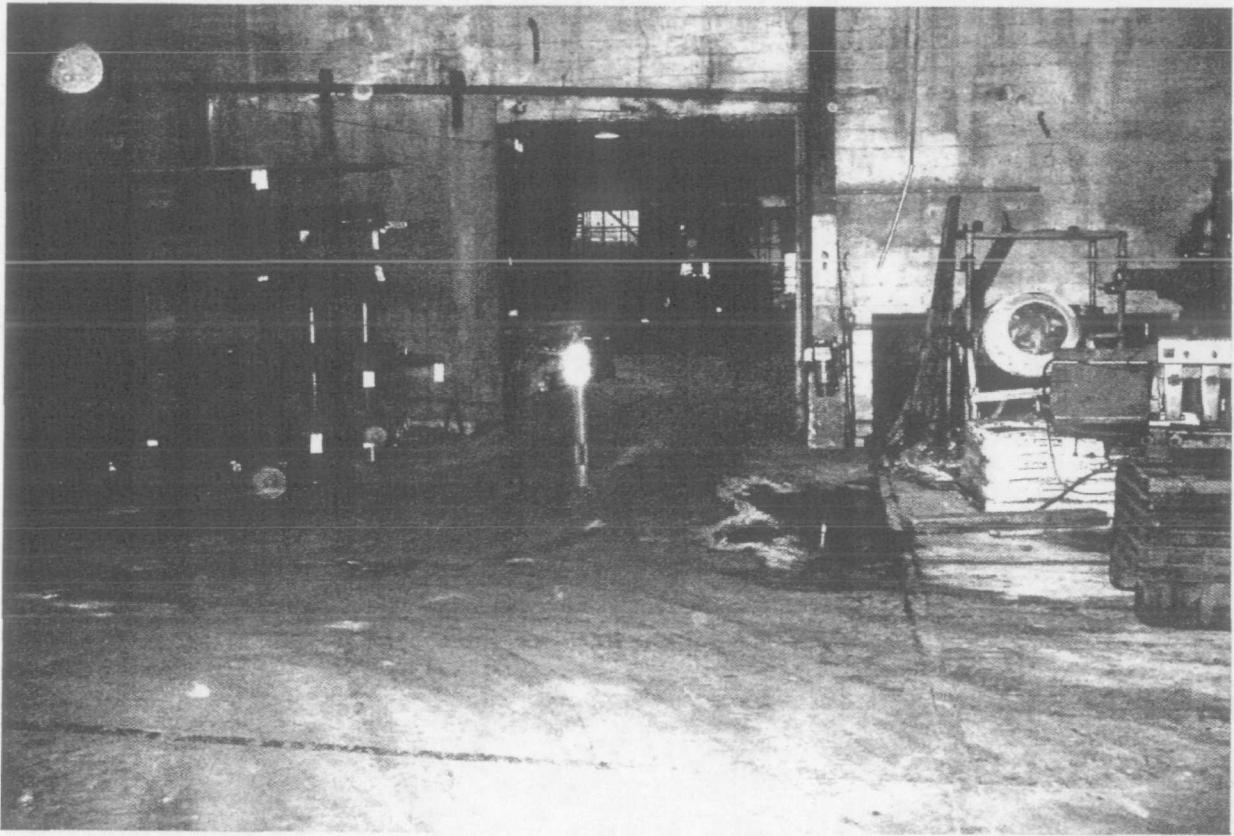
View to the east of the location of GP-5 between the Columbia Forge and Lampros Steel buildings.
